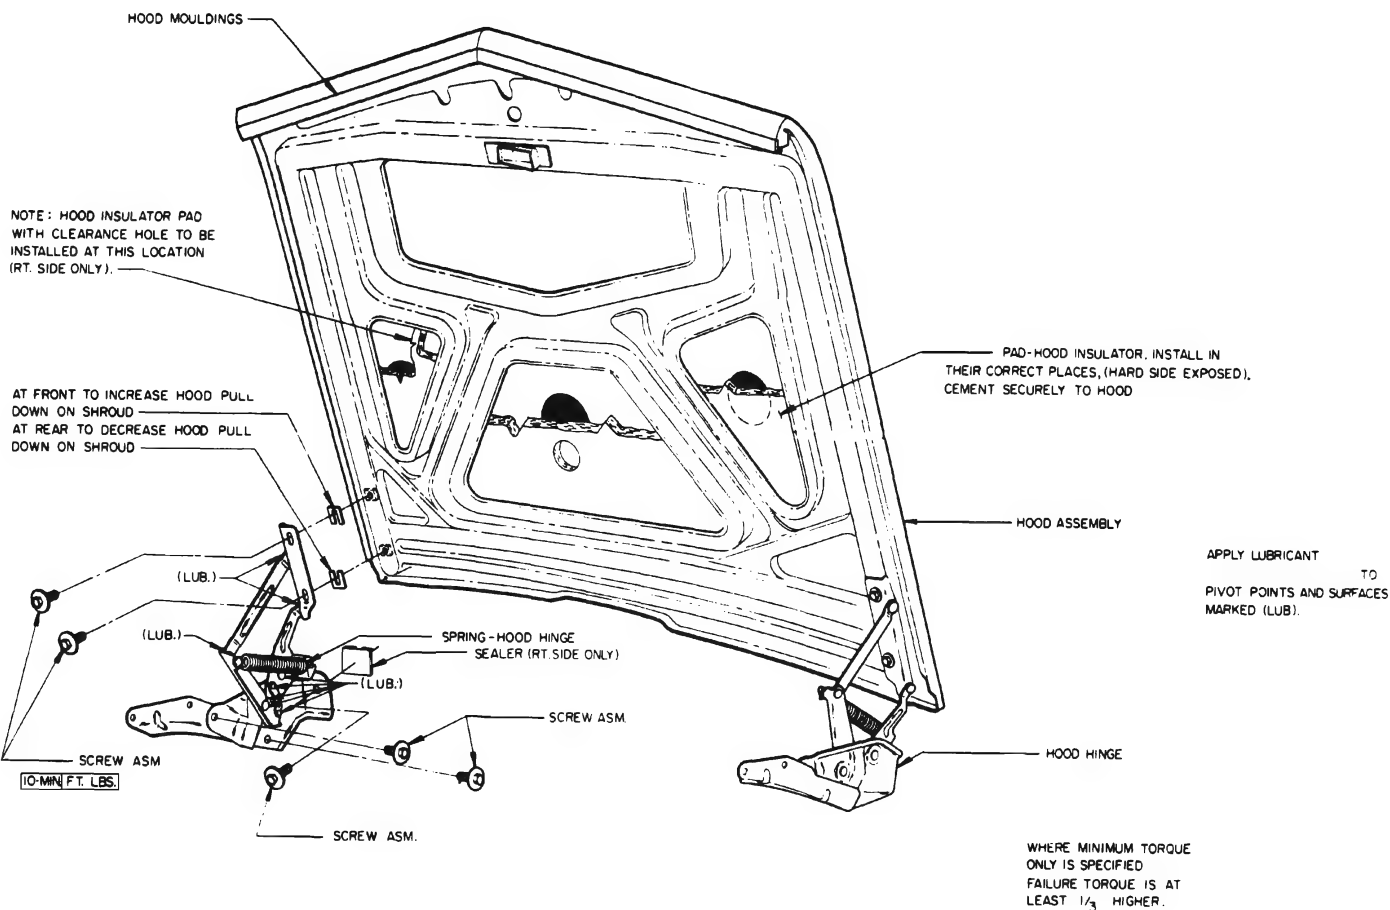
Hood & Hood Hinge Assembly—4700 Series
